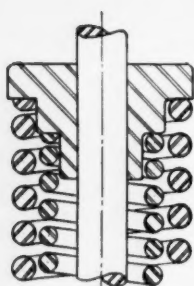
Cross-sectional sketch showing the use of a two-step end cap for centering two springs, one inside the other.
